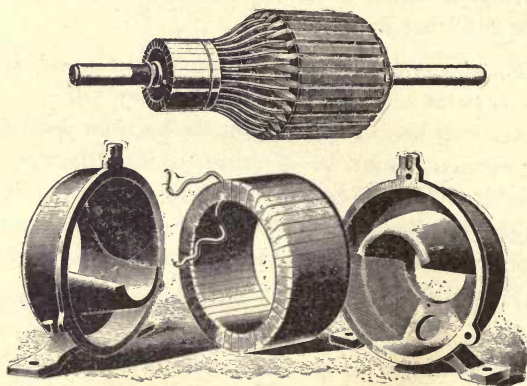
ARMATURE, FIELD COIL AND CASTINGS.
